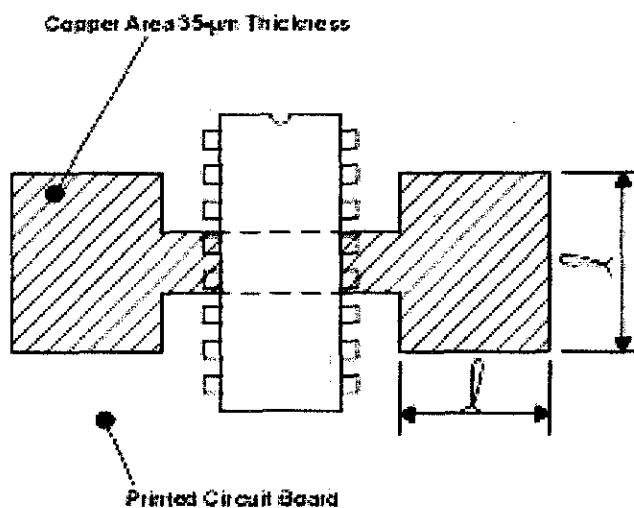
Example of Printed Circuit Board Copper Area (used as heat sink)
